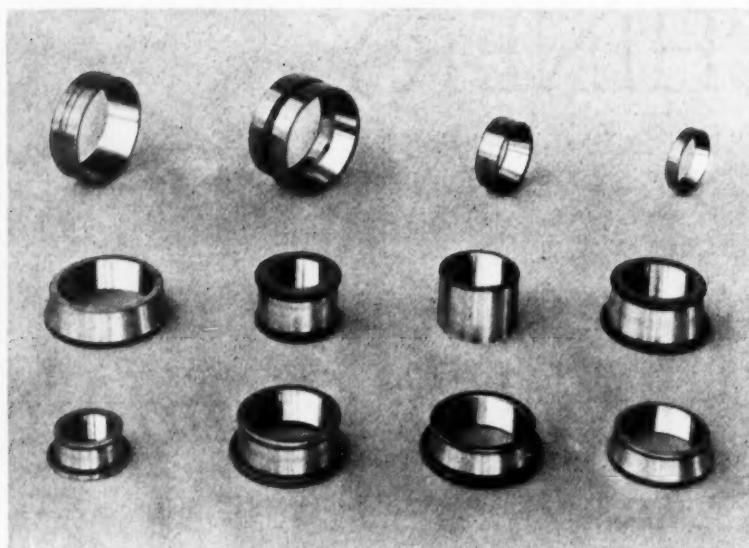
Internal Centerless Grinding is Now Applied to Finishing Straight and Tapered Bores in Parts with Cylindrical, Tapered, or "Shouldered" Outside Surfaces
